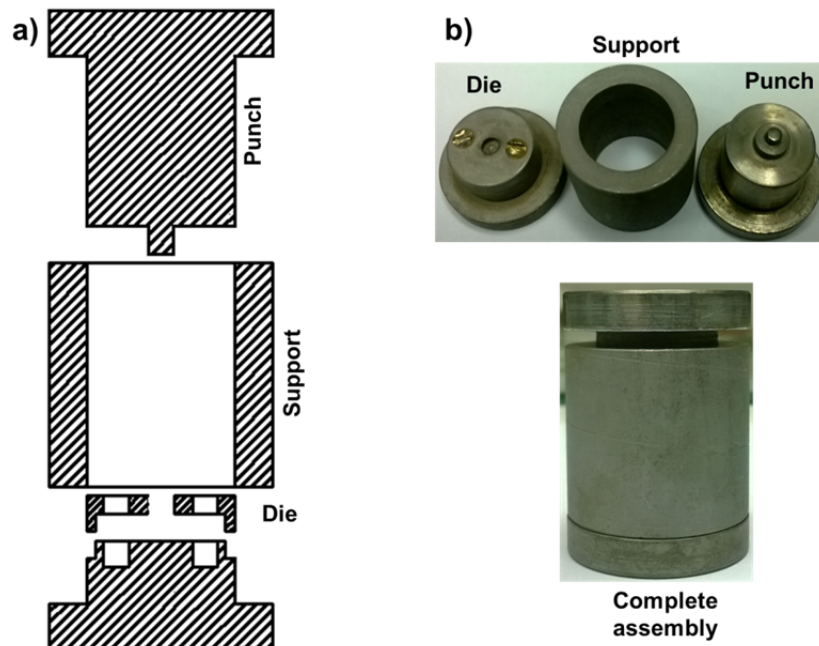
Die-punch assembly used for fabrication of pellet out of nanopowder: (a) cross sectional view and (b) photograph.
